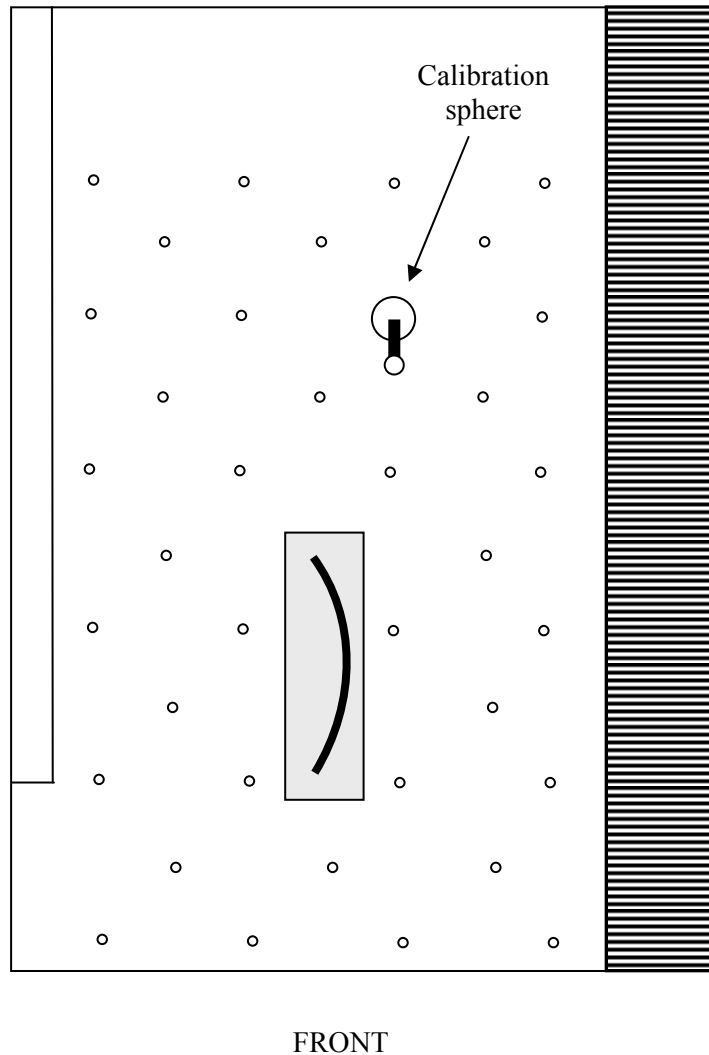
Setup for panel measurement on the CMM (top view of machine).
